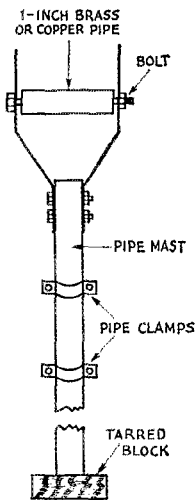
A Y-bracket holding a brass-pipe roller is more reliable than most pulleys and makes it possible to rethread a halyard without lowering the mast. Pipe clamps can be used to fasten the mast against masonry and the tarred block protects the roof.
